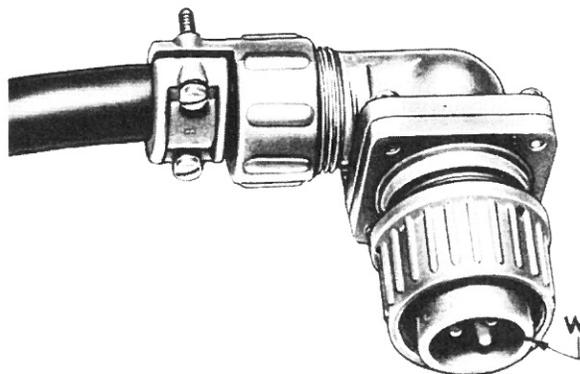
Elbow and Plug Body of Type AN-3108-16-10P Joined Together
